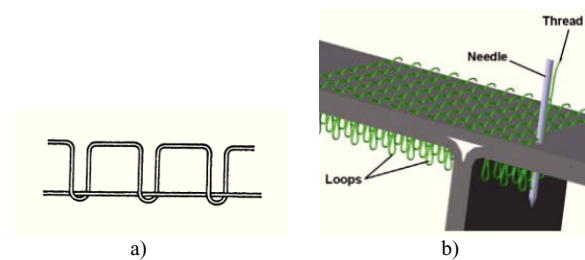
a) Modified lock stitch [5] and b) Tufting of a T-joint [9].
